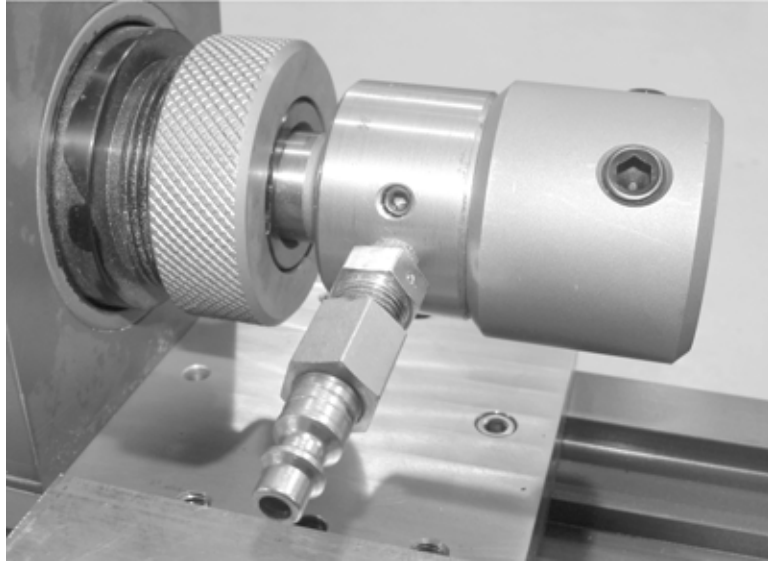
The air chuck has a compressed air adapter to provide air flow to the insert holders.
